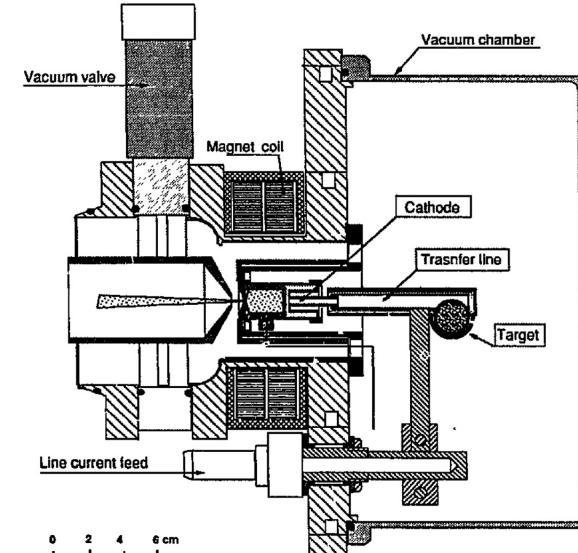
Target and ion source assembly with plasma ion source MK5. The vacuum valve is part of the assembly.
